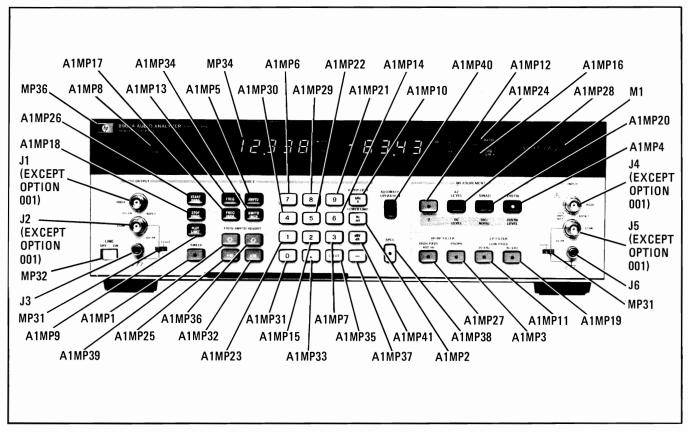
Chassis and Mechanical Parts Identification — Front Panel
